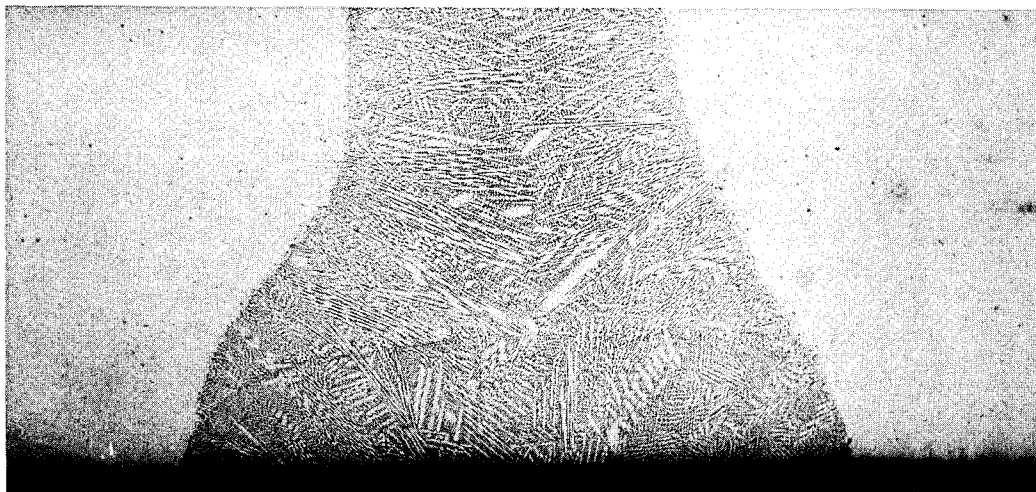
Fracture Surface Between Boss and Tank Liner
